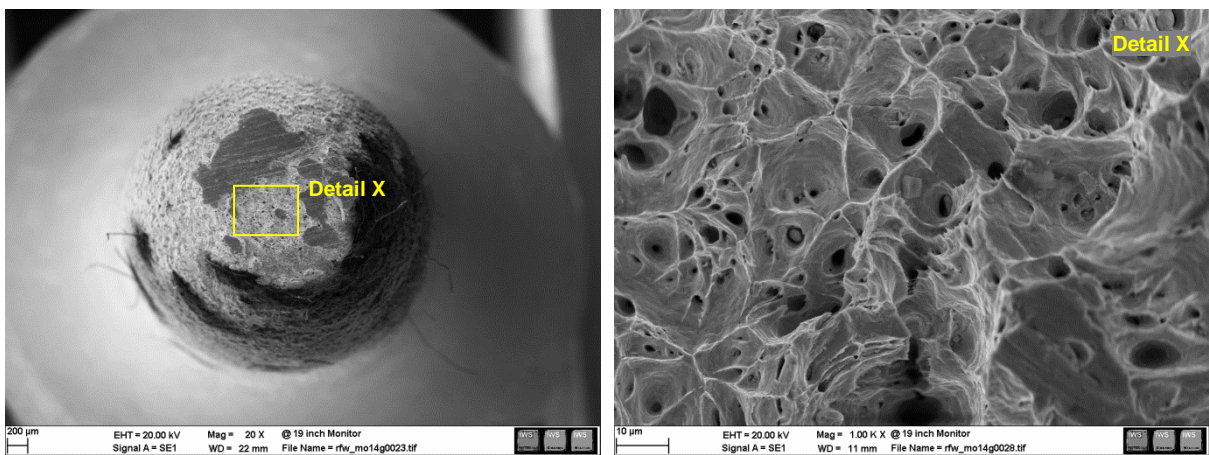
Ductile fracture surface and detail X for 1200°C tensile specimen W-09 RRB2
